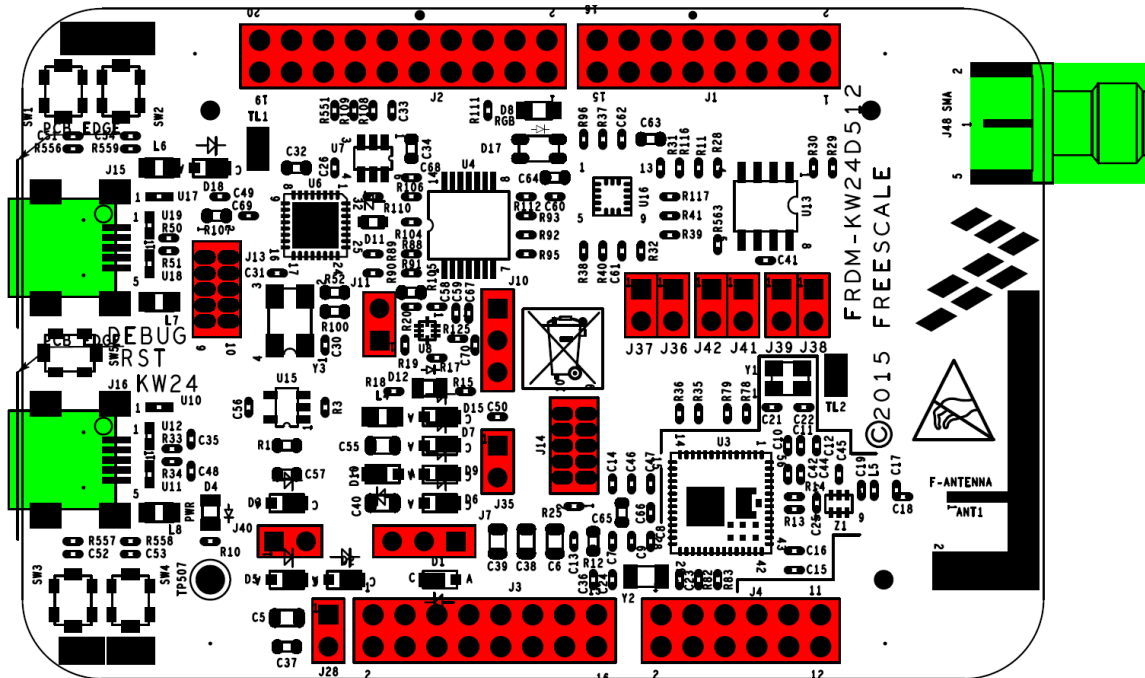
FRDM-KW24D512 board top side (component side) footprint
